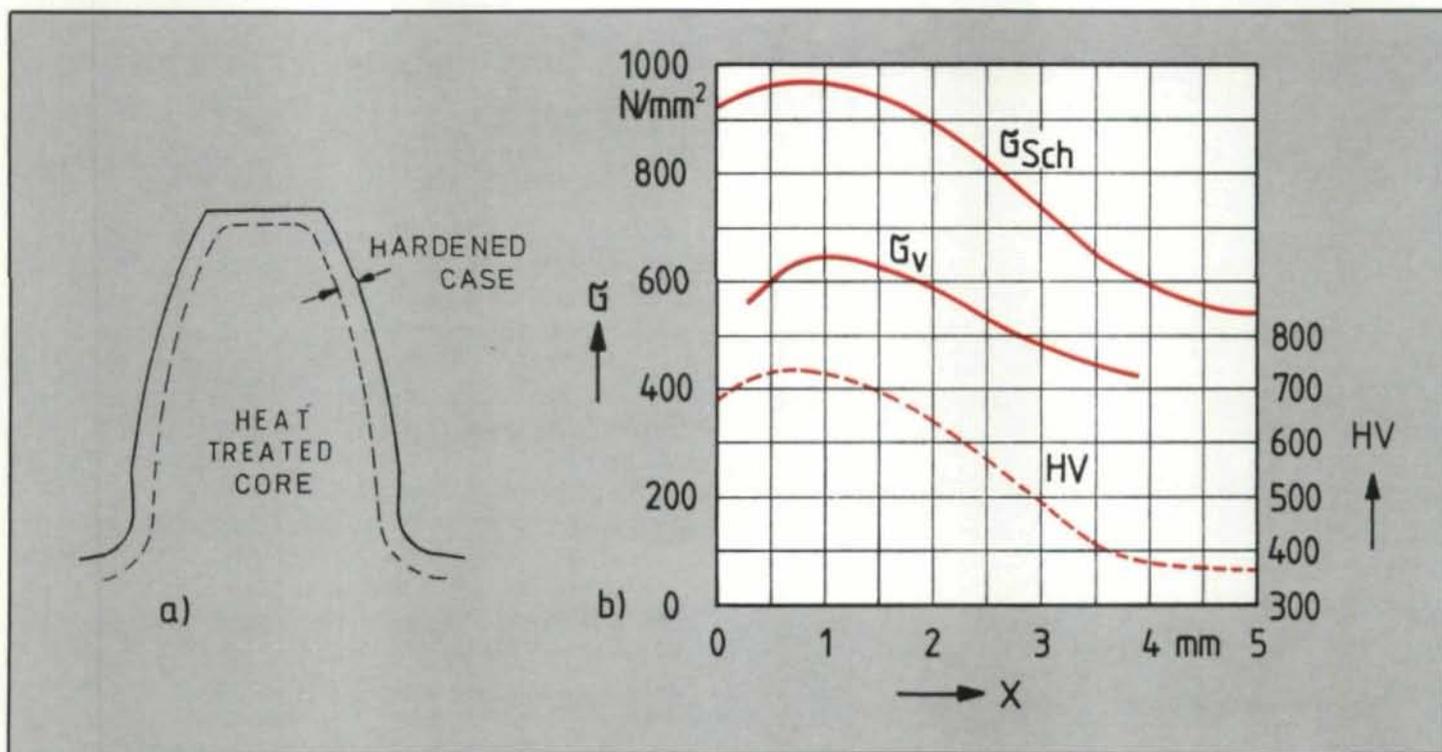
a) Cross section through a tooth of case hardened gear, schematic
